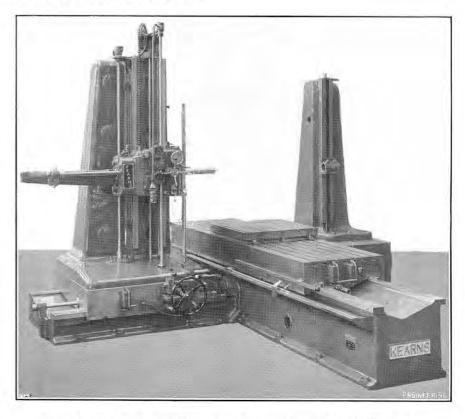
Planer-Table Horizontal Boring Machine; H. W. Kearns and Co., Ltd.
